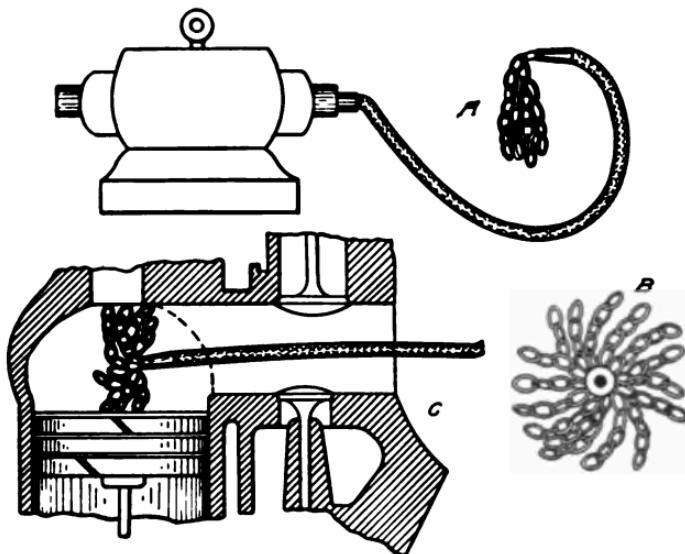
Removing Carbon with Flexible Shaft and Old Chain.
